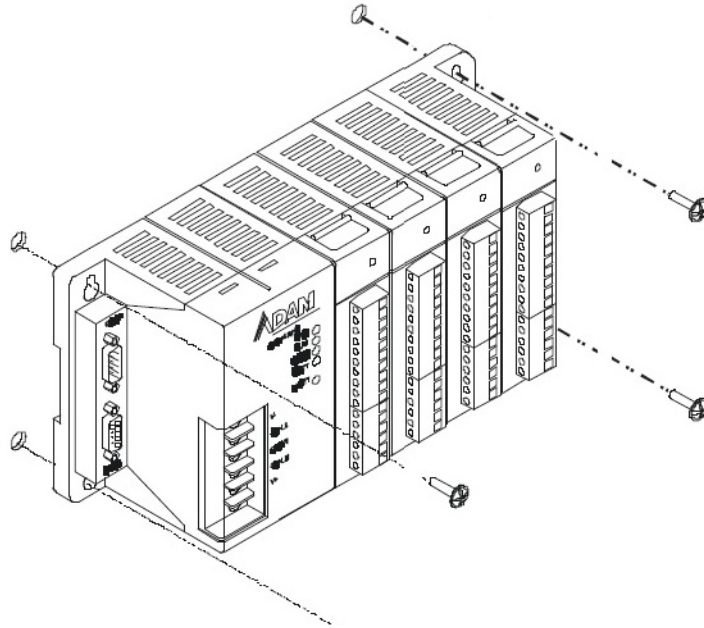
ADAM-5000/ECAT panel mounting screw placement
